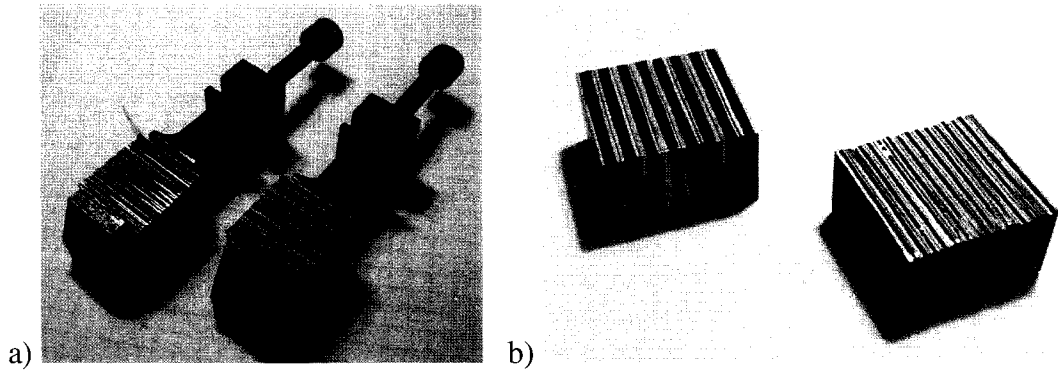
Test samples: a) assembled and clamped; b) adhesive cured, clamps removed
